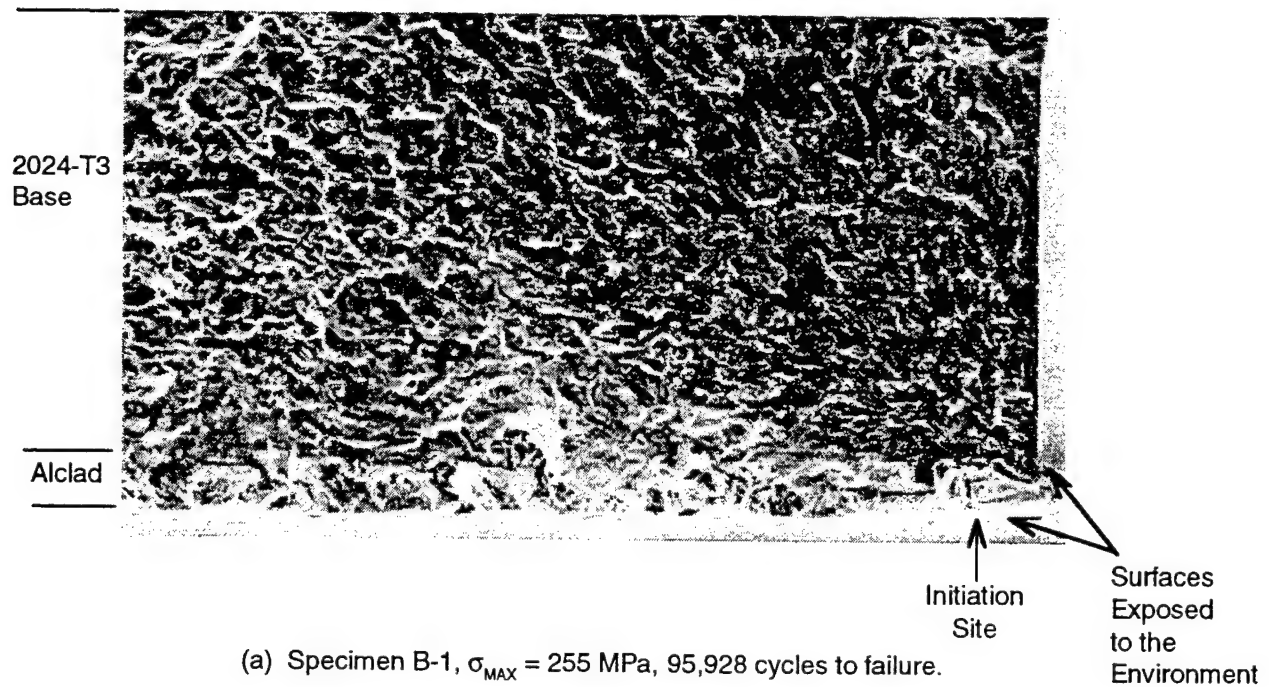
FRACTURE SURFACE APPEARANCE OF ALCLAD 2024-T3 FATIGUE SPECIMENS TESTED IN AIR.
